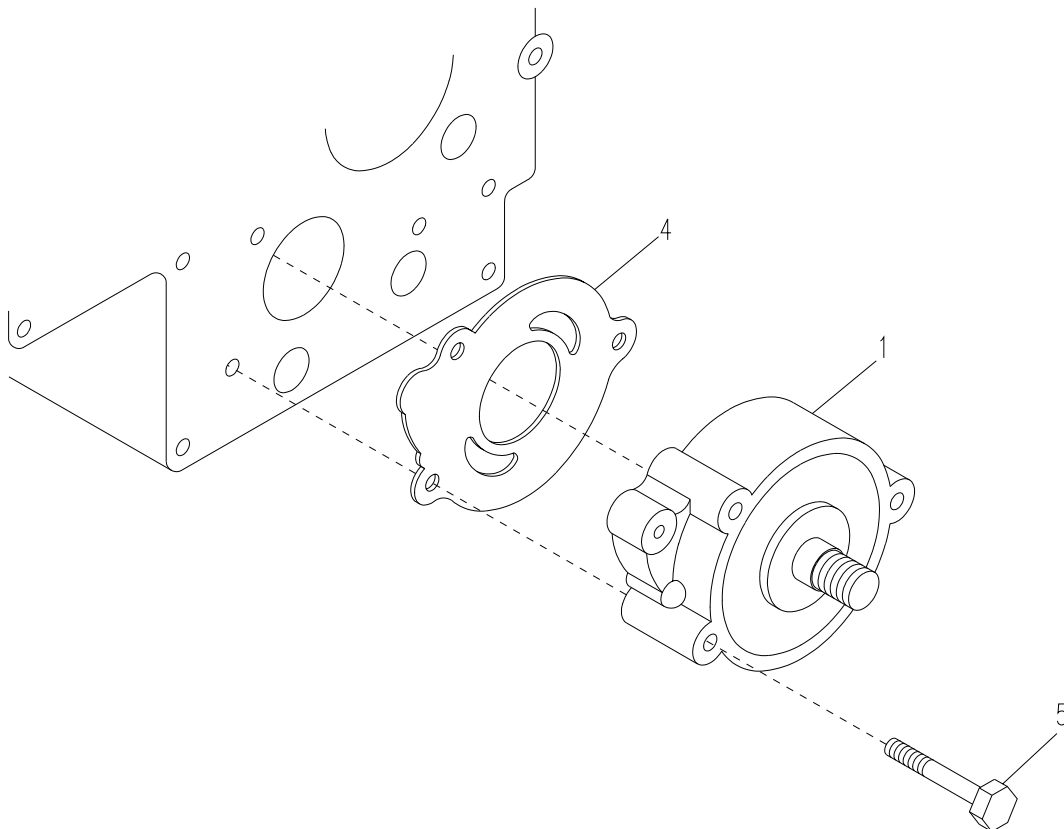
Oil Pump Assembly (Sheet 2 of 2)
